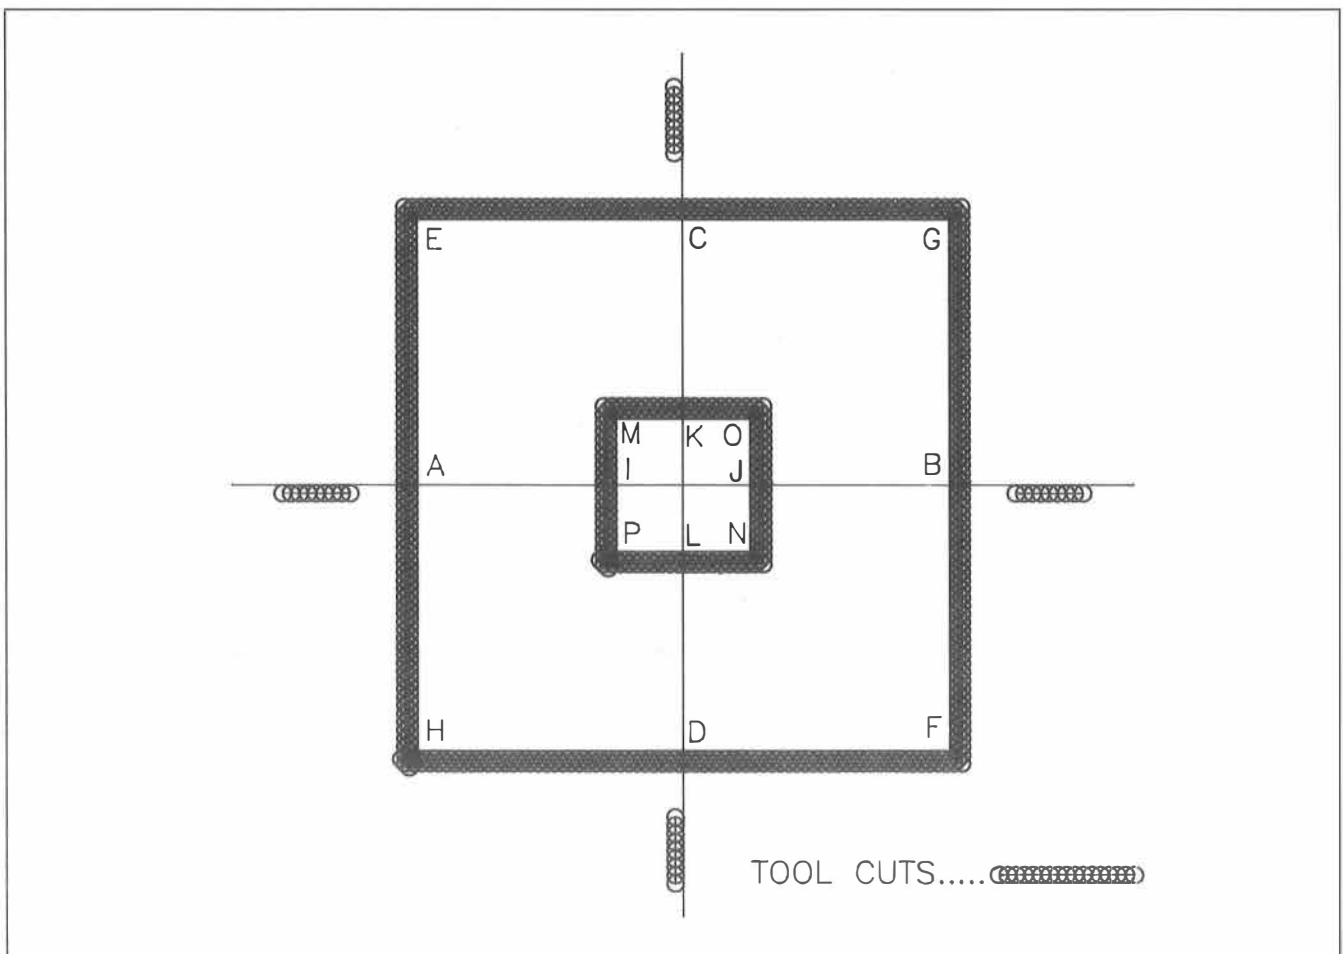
Drawing showing accuracy cuts in acrylic sheet and measurement points for both the 2-inch and 8-inch squares.
